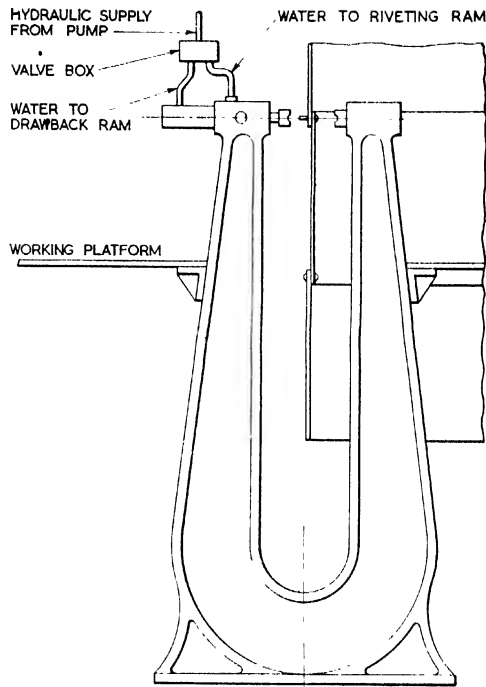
VERTICAL-TYPE HYDRAULICALLY OPERATED RIVETING MACHINE
